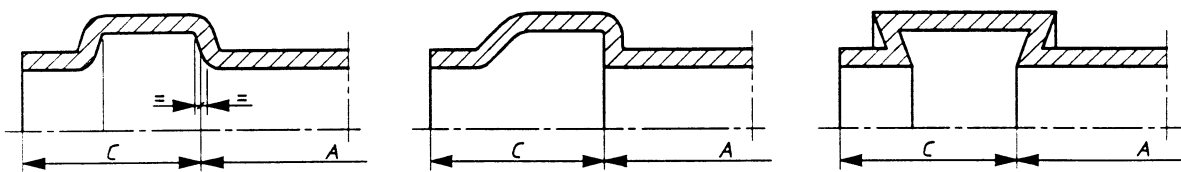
Typical groove designs for elastomeric ring seal sockets
